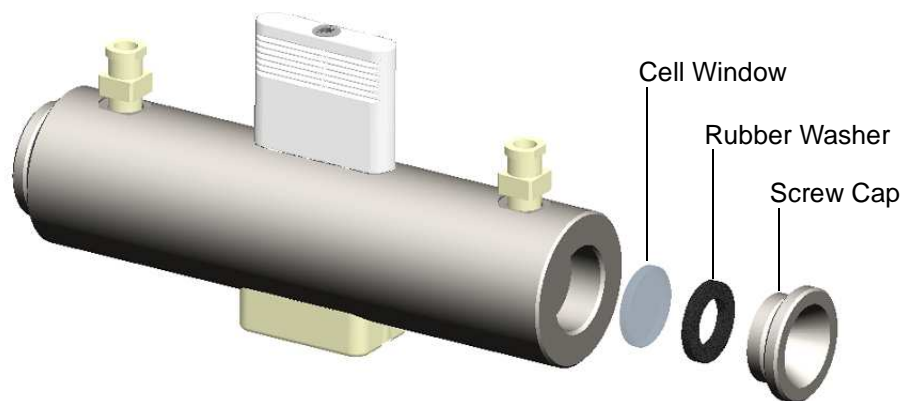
1 Assembly of cell windows: The rubber washer is not a gasket.
